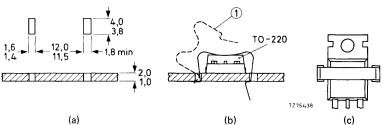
(a) Heatsink requirements; (b) mounting (1 = spring clip); (c) position of the device (top view).
